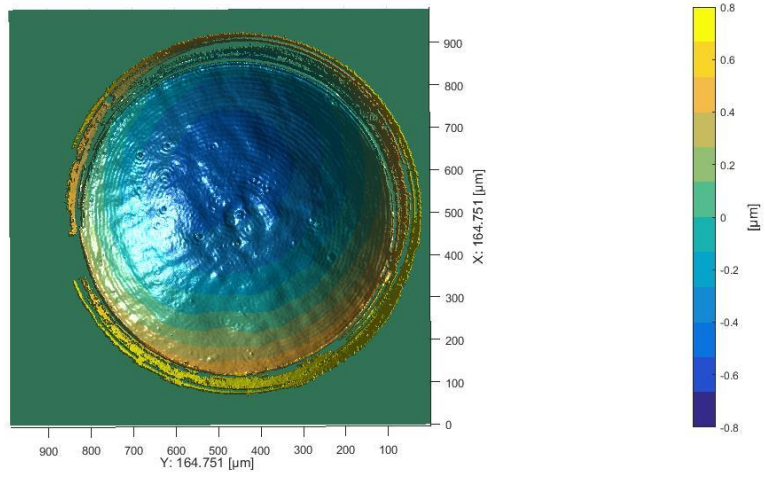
Shape of the NiP coated stainless steel insert after molding
